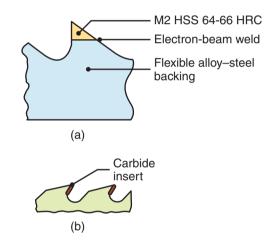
(a) High-speed-steel teeth welded onto a steel blade. (b) Carbide inserts brazed to blade teeth.
